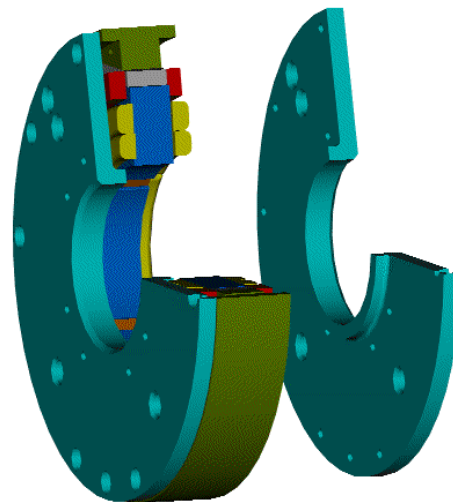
Two Piece Stator Prior to Assembly (Inboard Thrust Pole is Split for Assembly)
